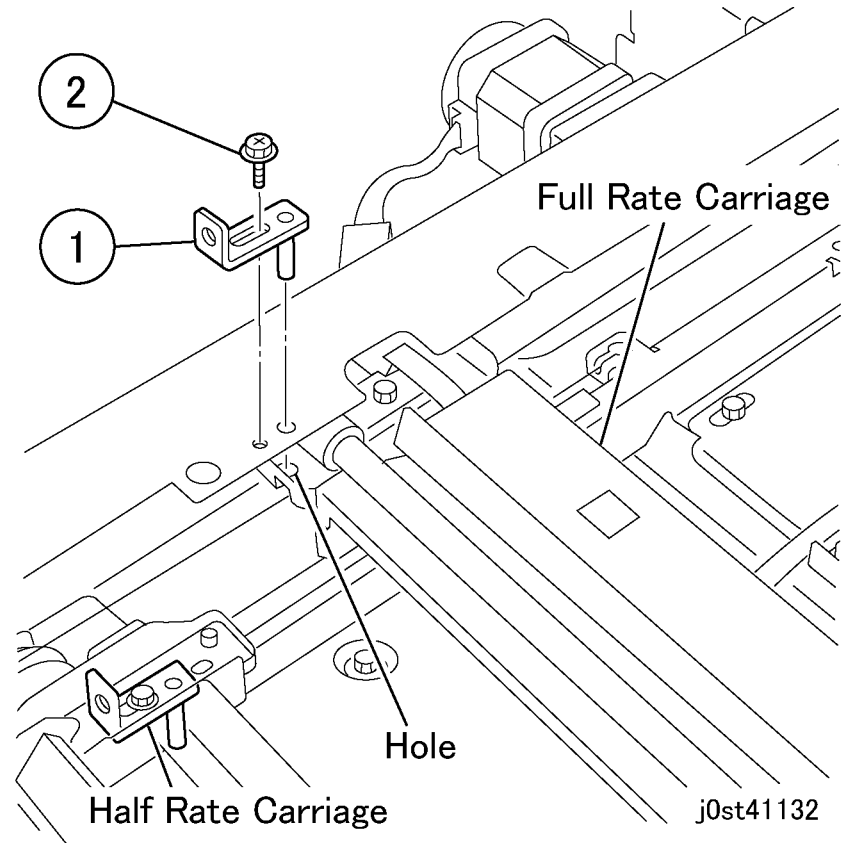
Position Adjustment of Full Rate Carriage 1/2
